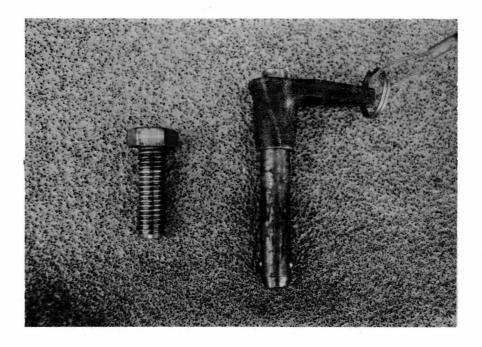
Typical field fasteners: a $\frac{1}{2}$ -in. - 13 threads/in. bolt and a $\frac{1}{2}$ -in. locking pin.
